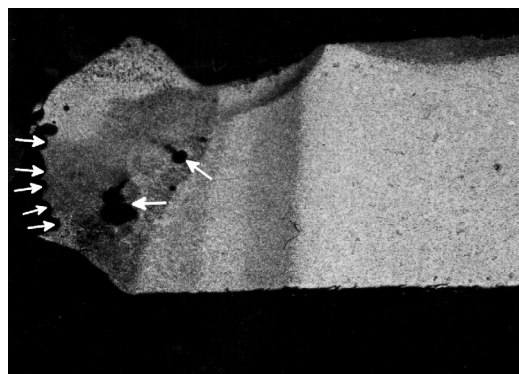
Pipe weld joint fracture arrowhead notation - defects
